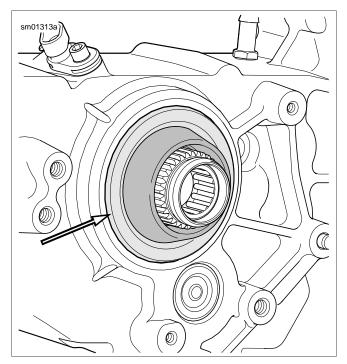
Install Main Drive Gear Seal (typical, XL model shown)
